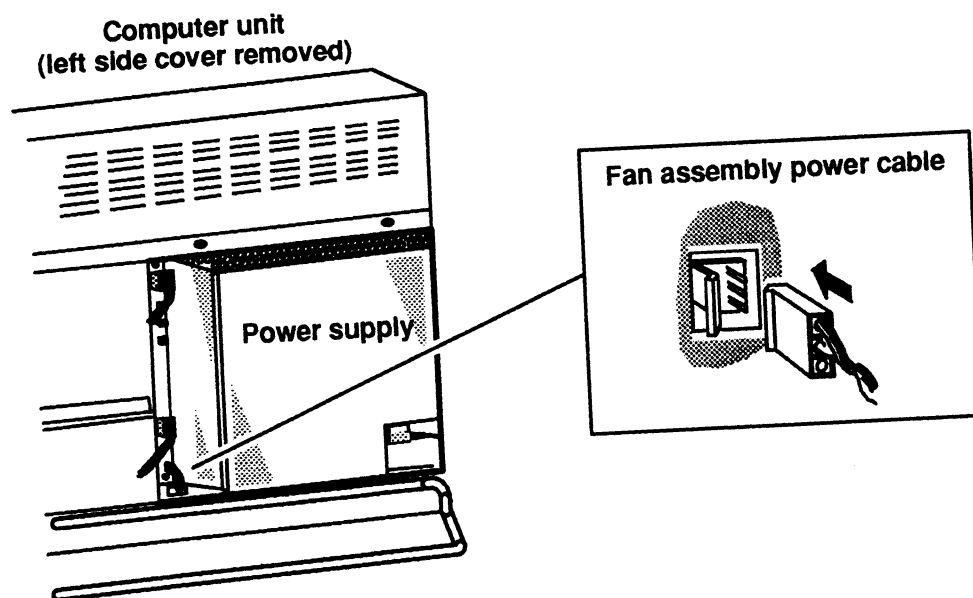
Plugging the Fan Assembly Power Cable into the Power Supply
